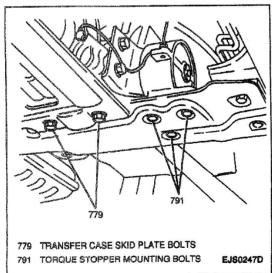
Torque Stopper and Transfer Case Skid Plate Bolts
